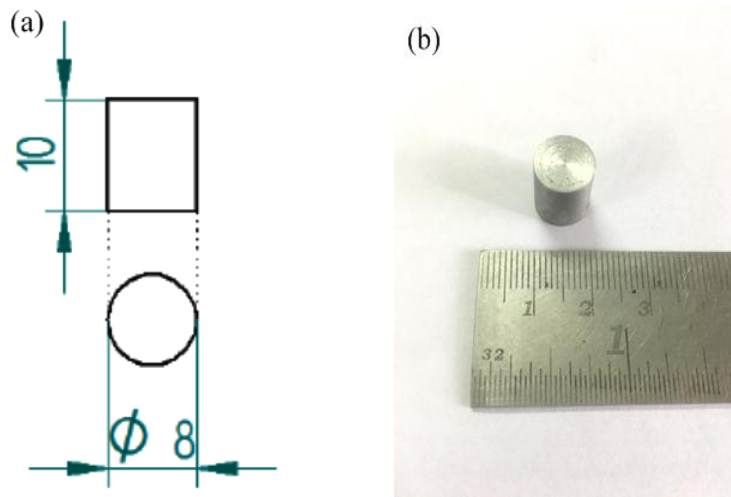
Compression test specimens in accordance with ASTM E9-09 standard (a) schematic view and (b) photographic image (all dimensions are in mm).
